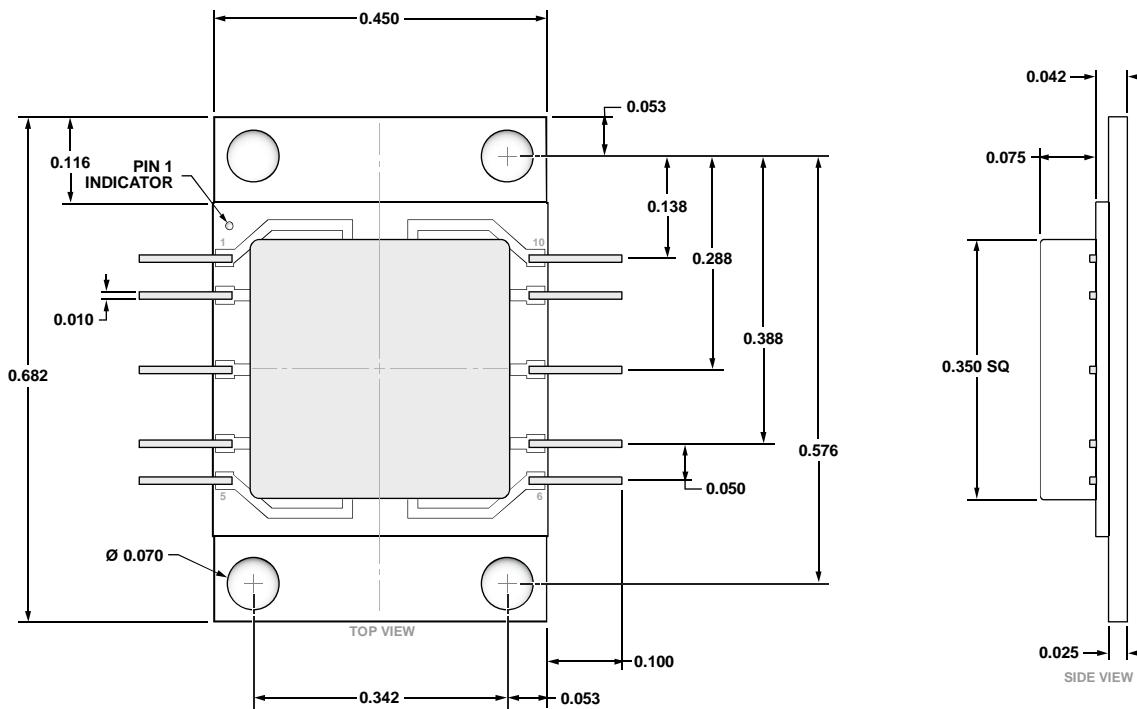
10-Lead Module with Flange Heat Sink [CFMP]
